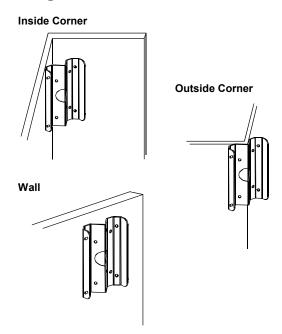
shows how the wall mount bracket [a] attaches to an inside corner, a wall, or an outside corner.
